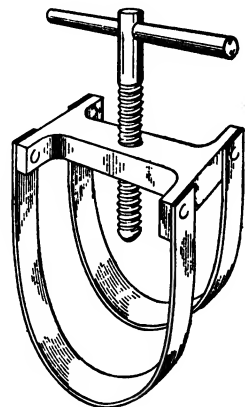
Piston Ring Puller Which Allows for Exit of Pin
